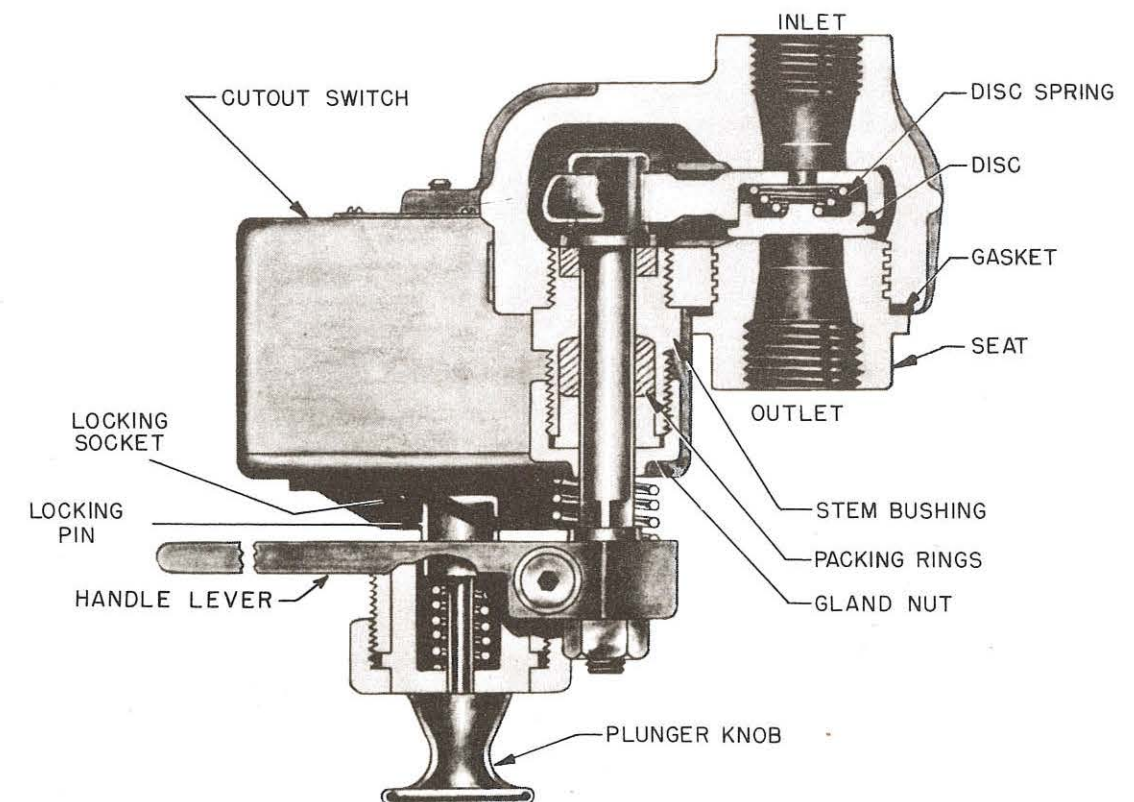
No. CH-4060-ATT Coil Blowdown Valve.
